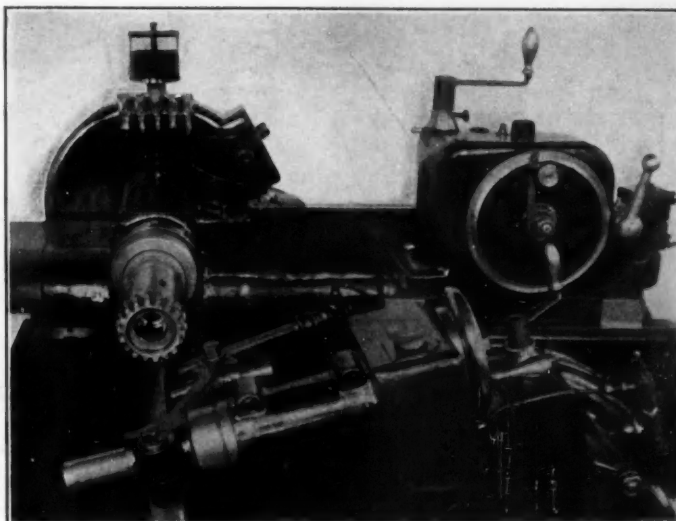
THE WHEEL-HEAD SWIVELED TO THE LEFT 14½ DEG. FOR GRINDING AN 18-TOOTH STEM GEAR ON THE COAST SIDE
